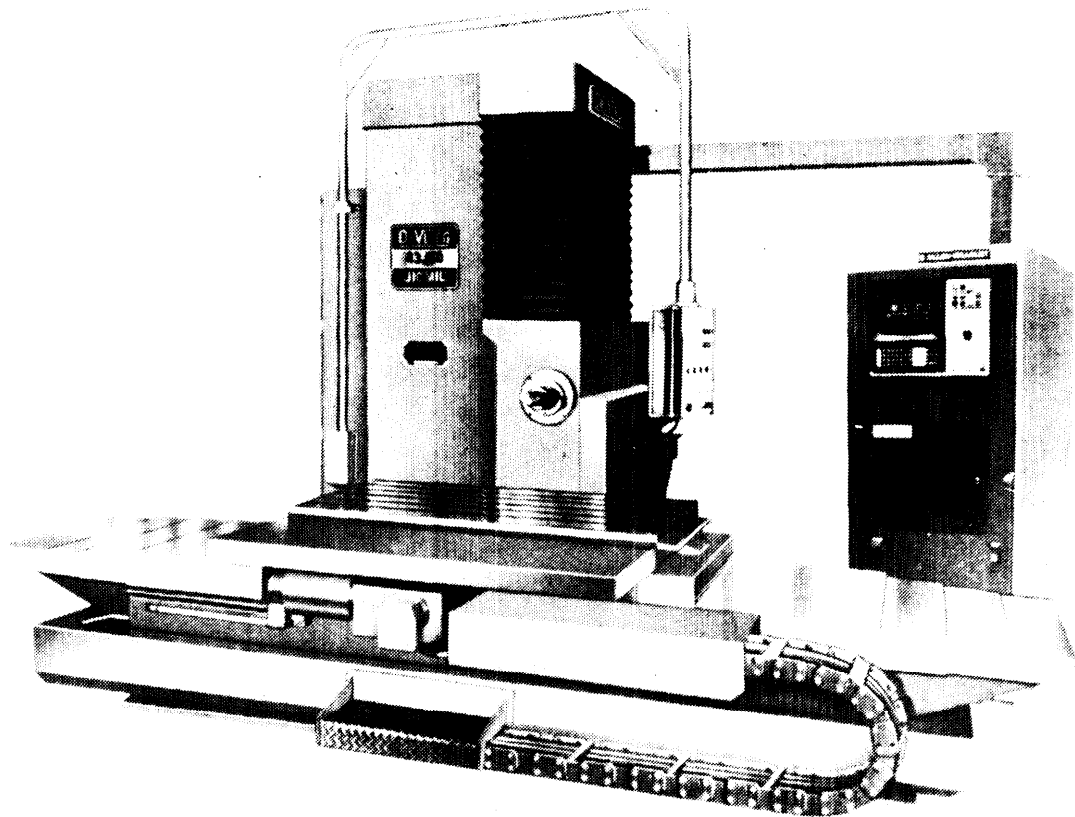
Four-axis, numerically controlled boring machine, precision, horizontal spindle, table-type. (DeVlieg Machine Company)
